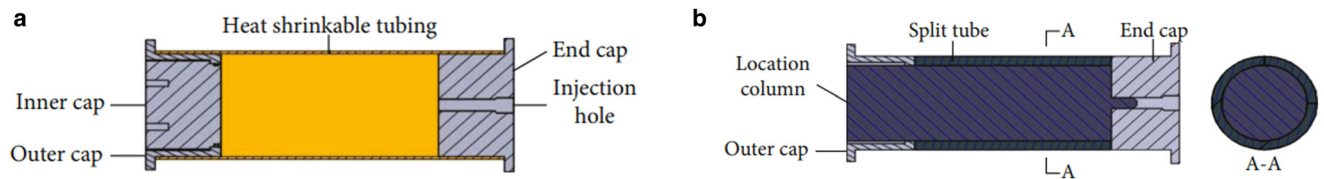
The components of (a) end caps and (b) assembly cylinder.
